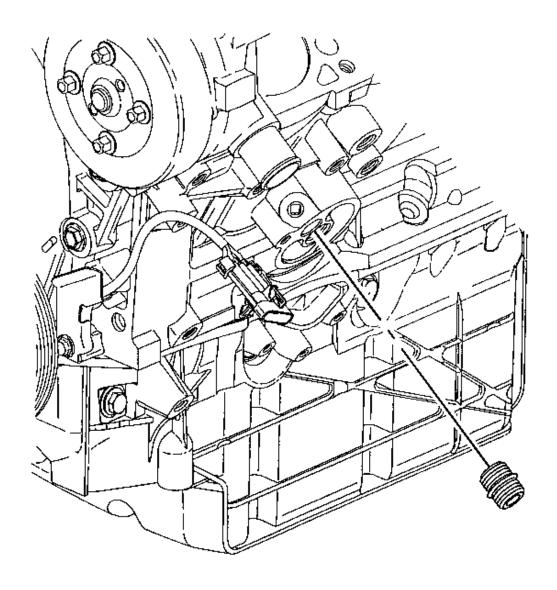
Removing Oil Filter Fitting Courtesy of GENERAL MOTORS CORP.
